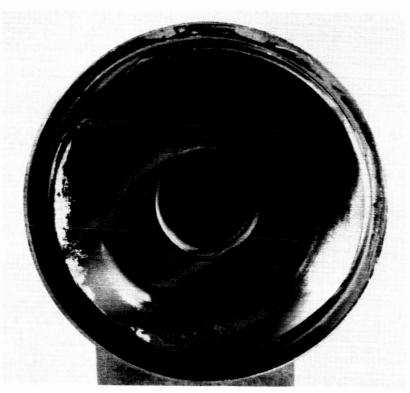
Mushroom Combustion Chamber (bottom view)
